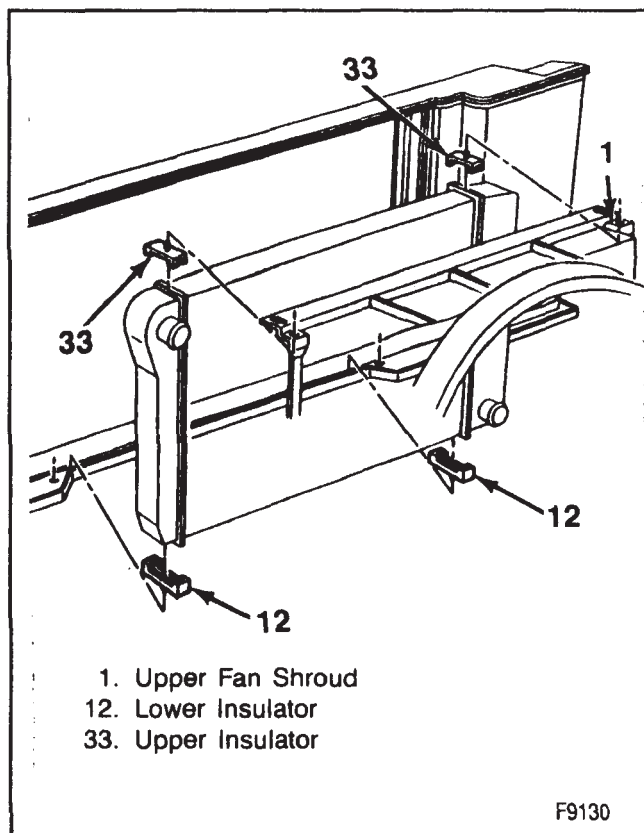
Radiator Replacement (2.5L, 2.8L, 4.3L Engines)
